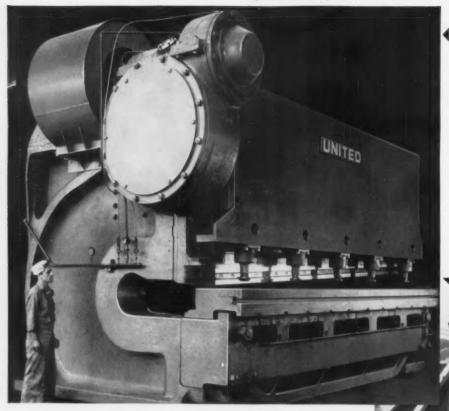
United's 630,000 psi Cone-Drive geared shear is more compact and streamlined and has a higher capacity than the spur-gear driven shear. Cone-Drive gears are enclosed in compact housing in foreground.
